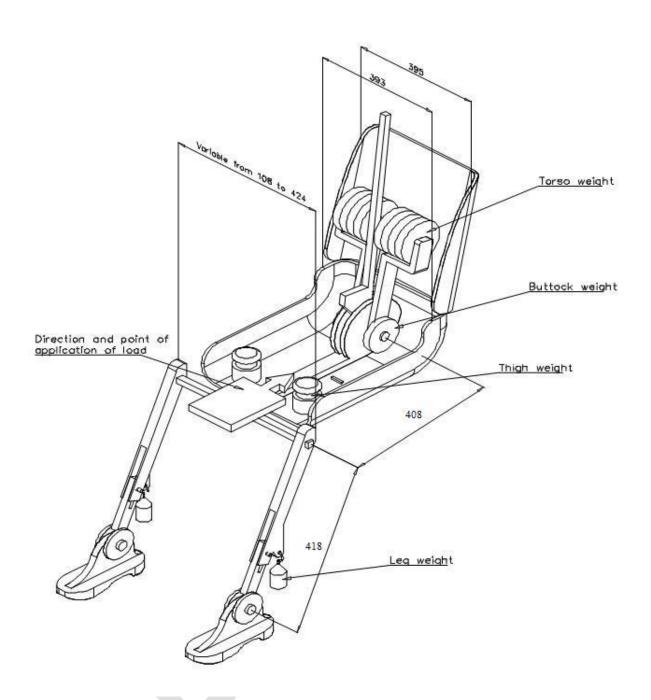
Dimensions of the 3-D H machine elements and load distribution (Dimensions in millimeters)
